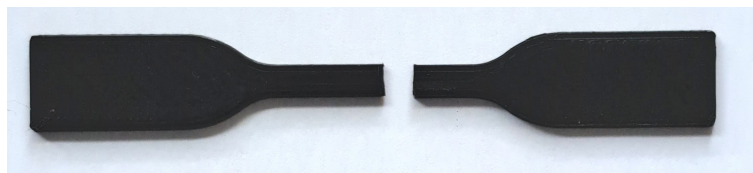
Fractured PLA/Fe₃O₄ tensile test sample
